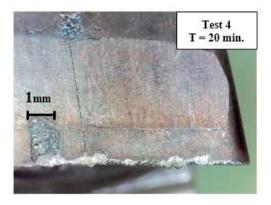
Chipping and non-uniform flank wear of the tool for conventional milling tests.
